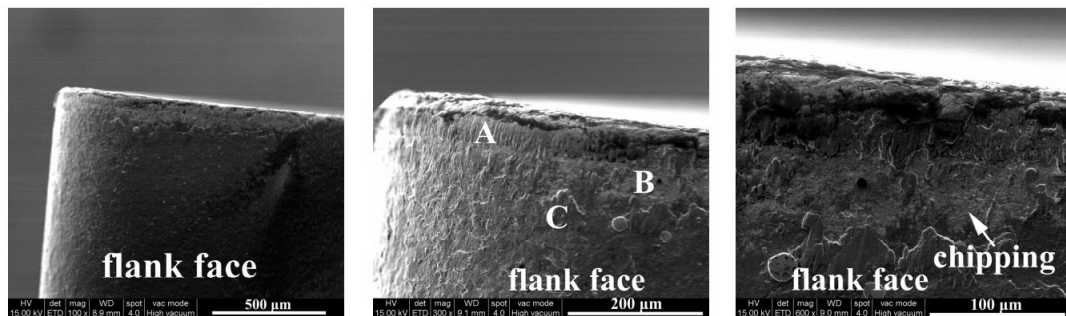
Tool wear mechanism at flank face (flank wear) [43]
